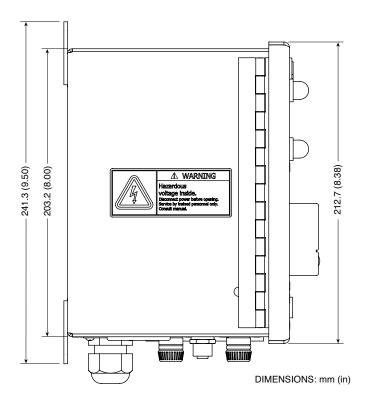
CNi-CB120SB Mounting Dimensions, Side View
